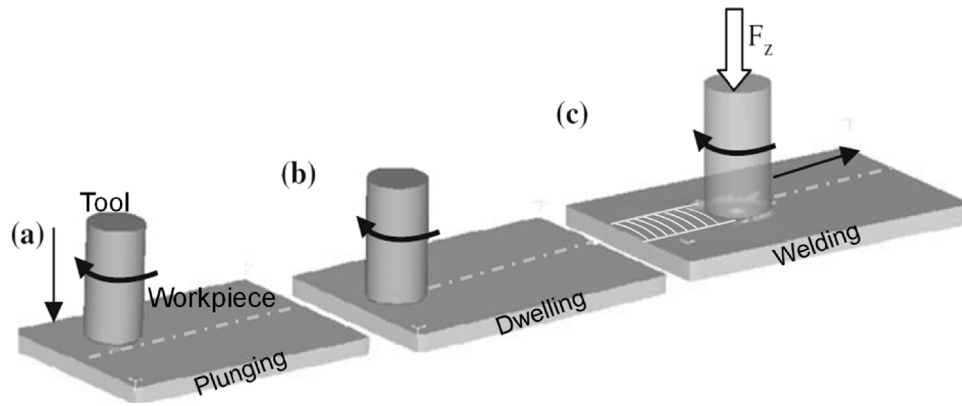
Different stages of friction stir welding process (a) plunging (b) dwelling (c) Welding.
